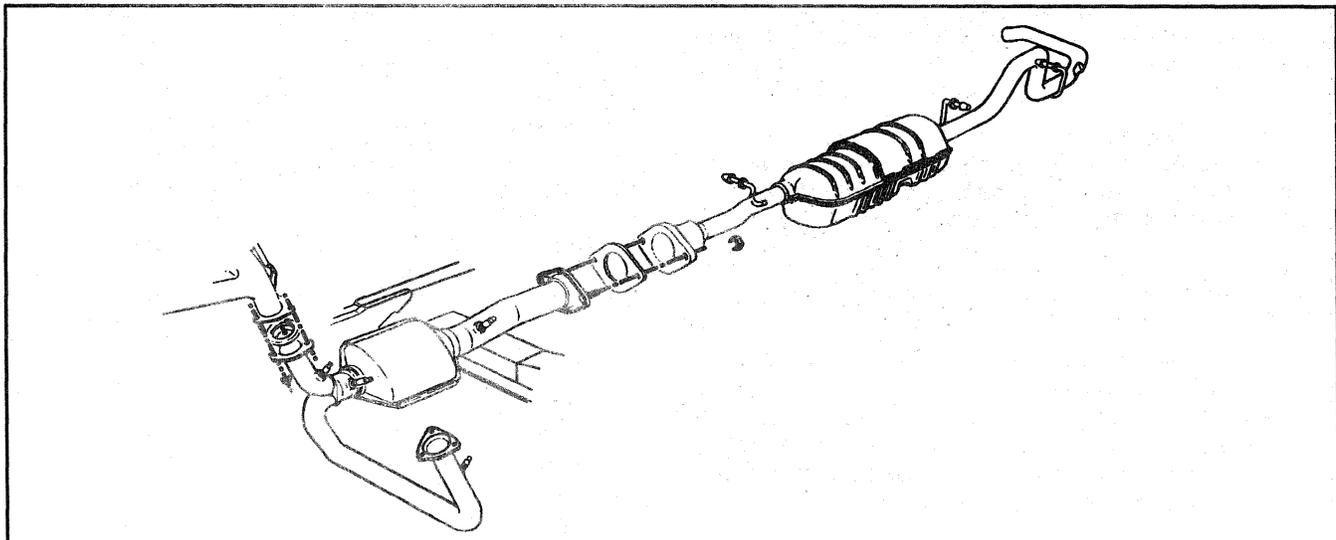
Exhaust System - C/K 1 Regular Cab Short Box w/4.3L Engine
